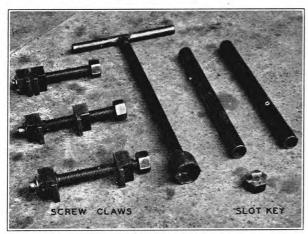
SCREW CLAWS, SLOT KEY AND SPANNER.
